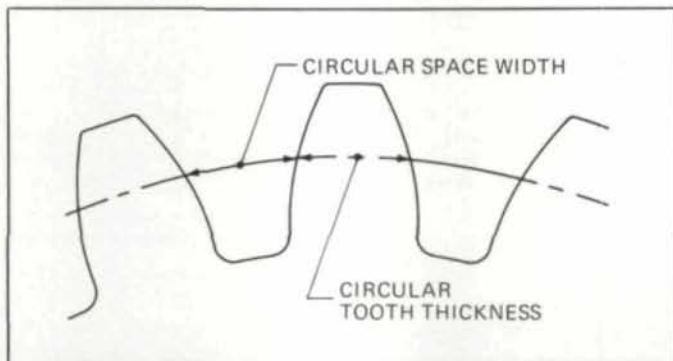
Circular space width and circular tooth thickness defined. When dealing with these measurements, the diameter at which they are measured must be specified.
